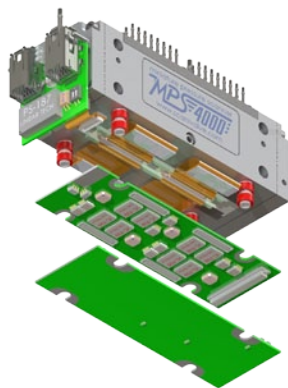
ELECTRONICS EXPLODED VIEW -NPX/CPX
